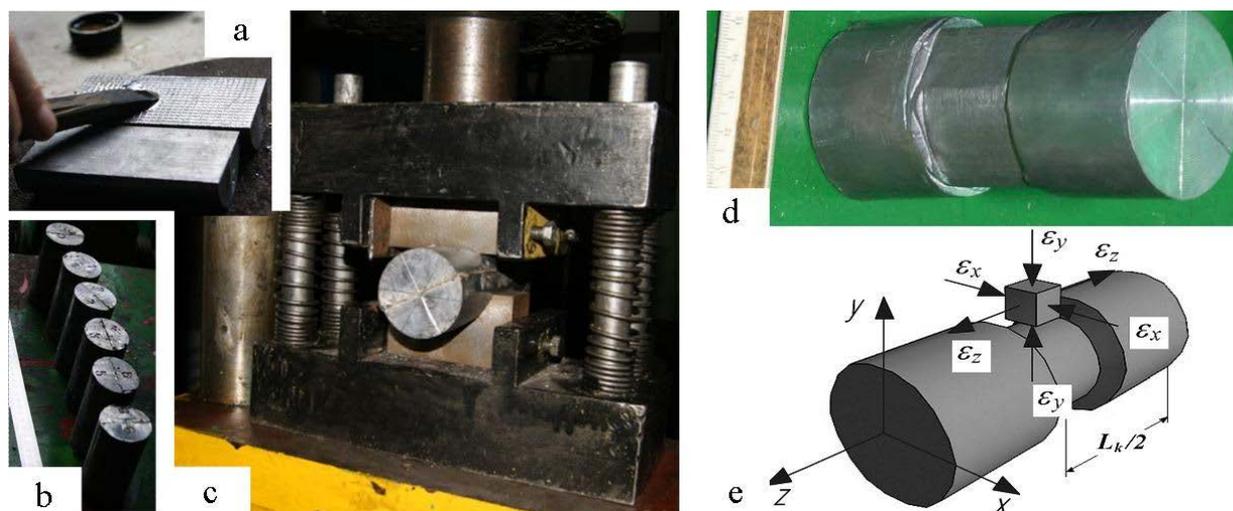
Preparation and forging of experimental samples: a – soldering by Wood's alloy of samples with coordinate grid; b – marking on the ends of soldered samples; c – forging of sample with marks in combined dies; d – sample after forging mode; e – mechanical scheme of strains
